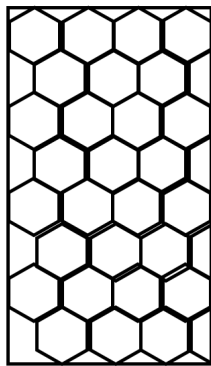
Layout of the side panel on the proposed design using a honeycomb structure.
